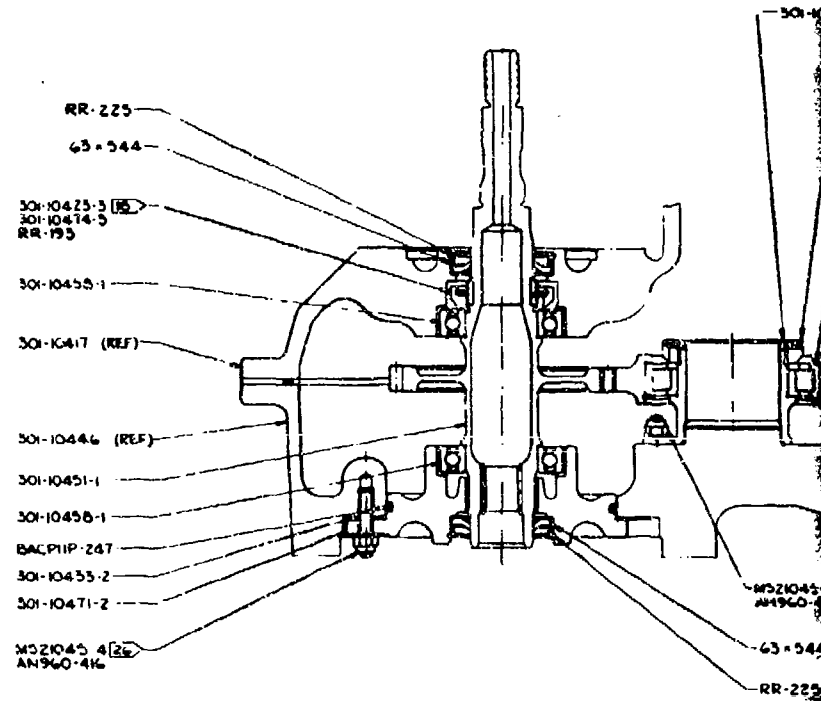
Aft Transmission Assembly (Sheet 2 of 5).
